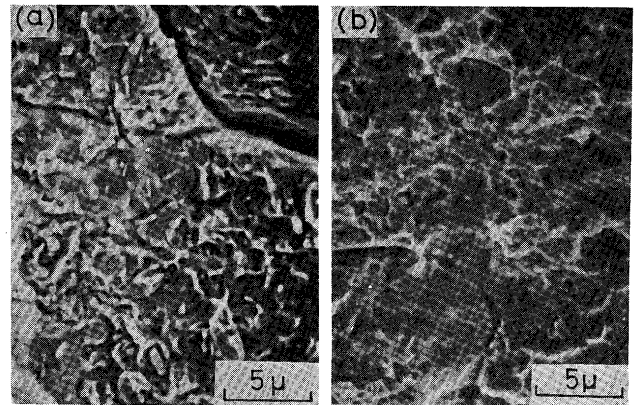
Fractographs of SCC (a) and tensile fracture at -196°C (b) for the specimen aged at 120°C for 1 month after solution heat treatment at 400°C for 2 hours.
